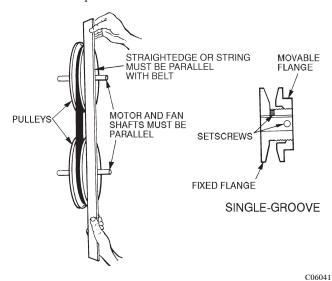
Evaporator-Fan Alignment and Adjustment
